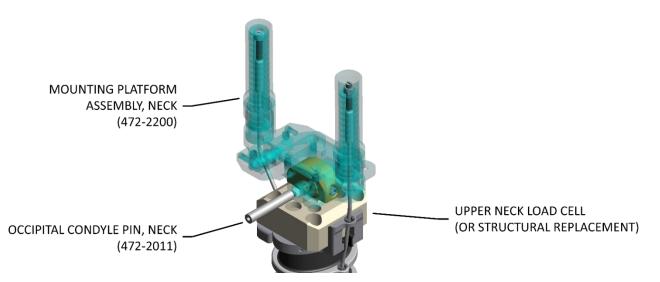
Pass OC Pin through Neck/Head Mounting Platform Assembly and Upper Neck LC
